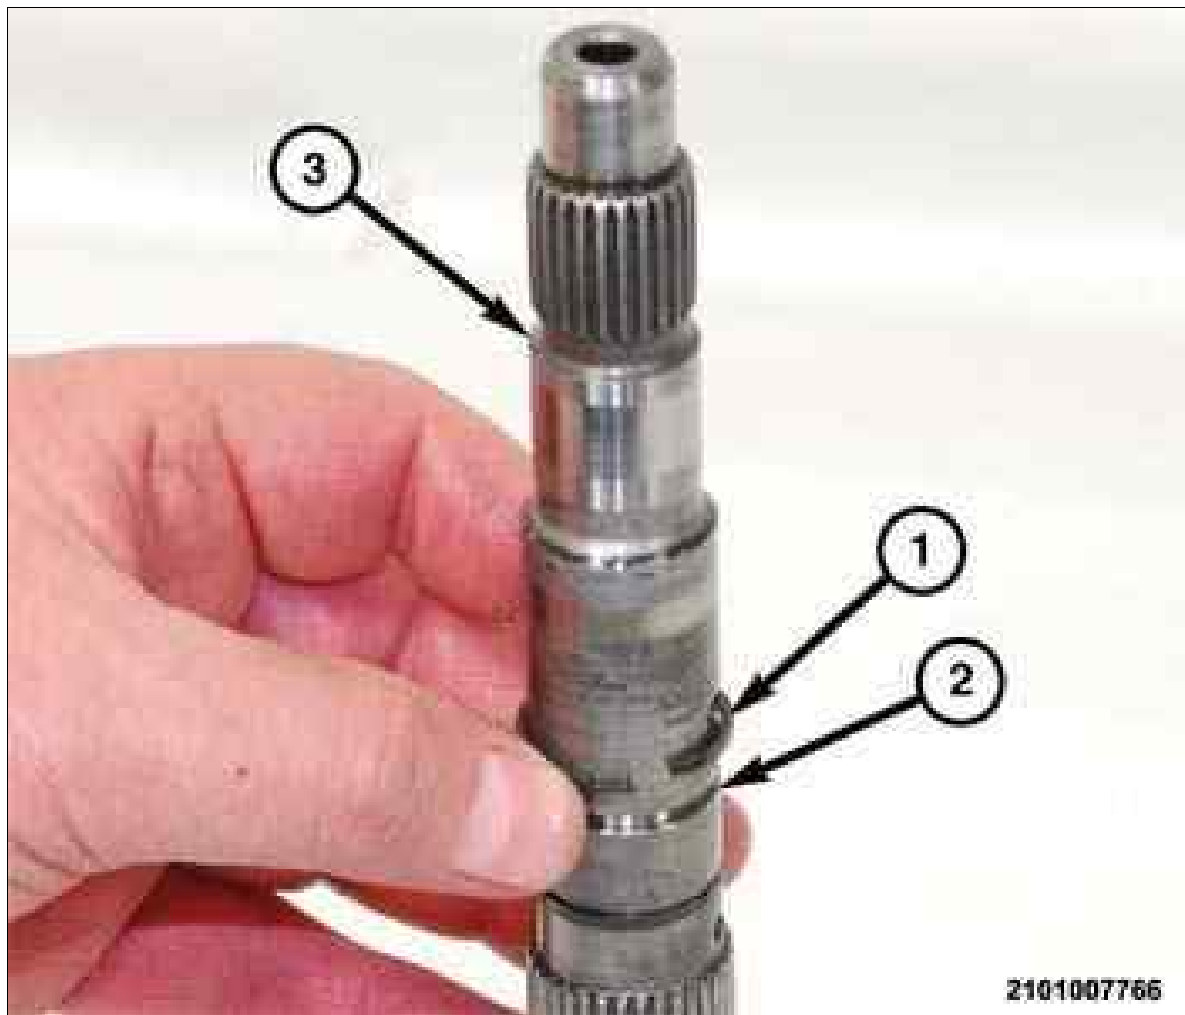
Annulus Gear 2, D & C-Clutch Hub And Input Shaft Assembly
